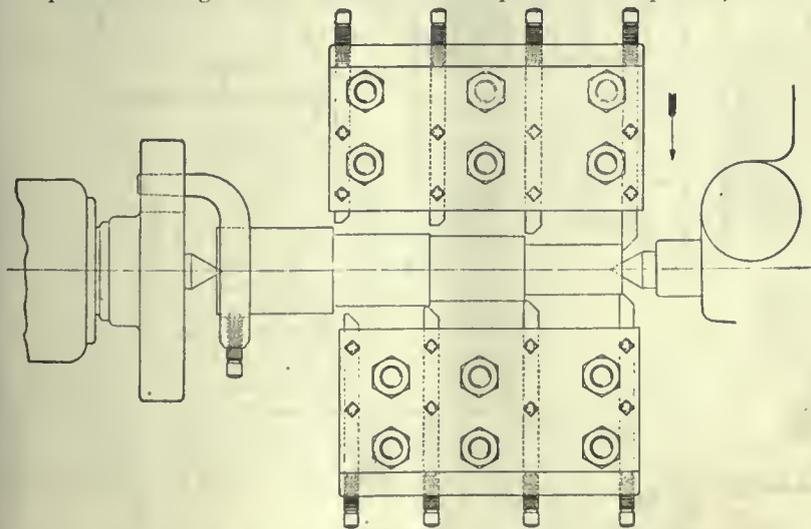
FINISHING OPERATIONS ON A SLEEVE BEVEL GEAR.
